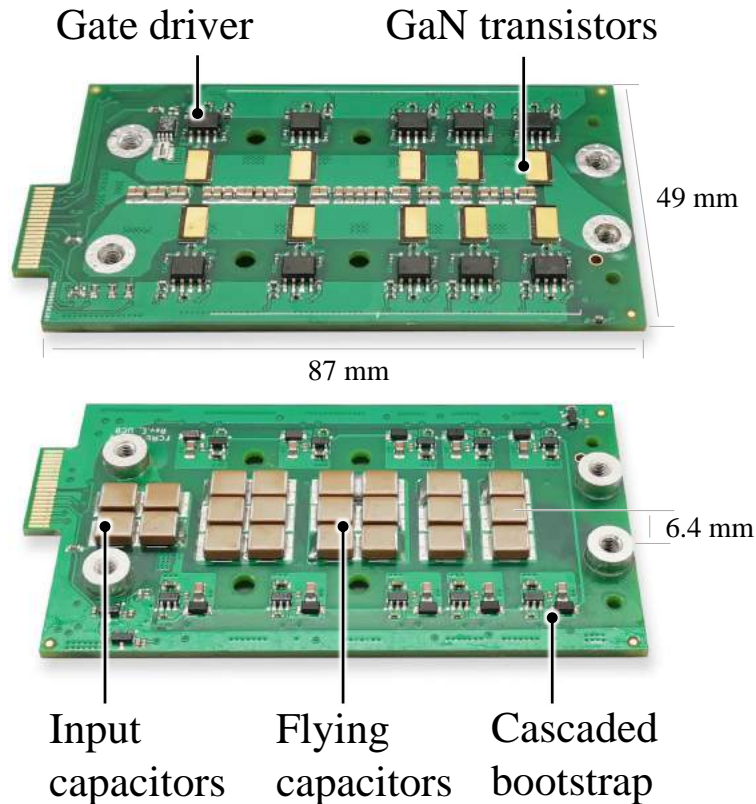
6-level FCML module without switching cell PCBs with dimensions. This module was contract-manufactured.
